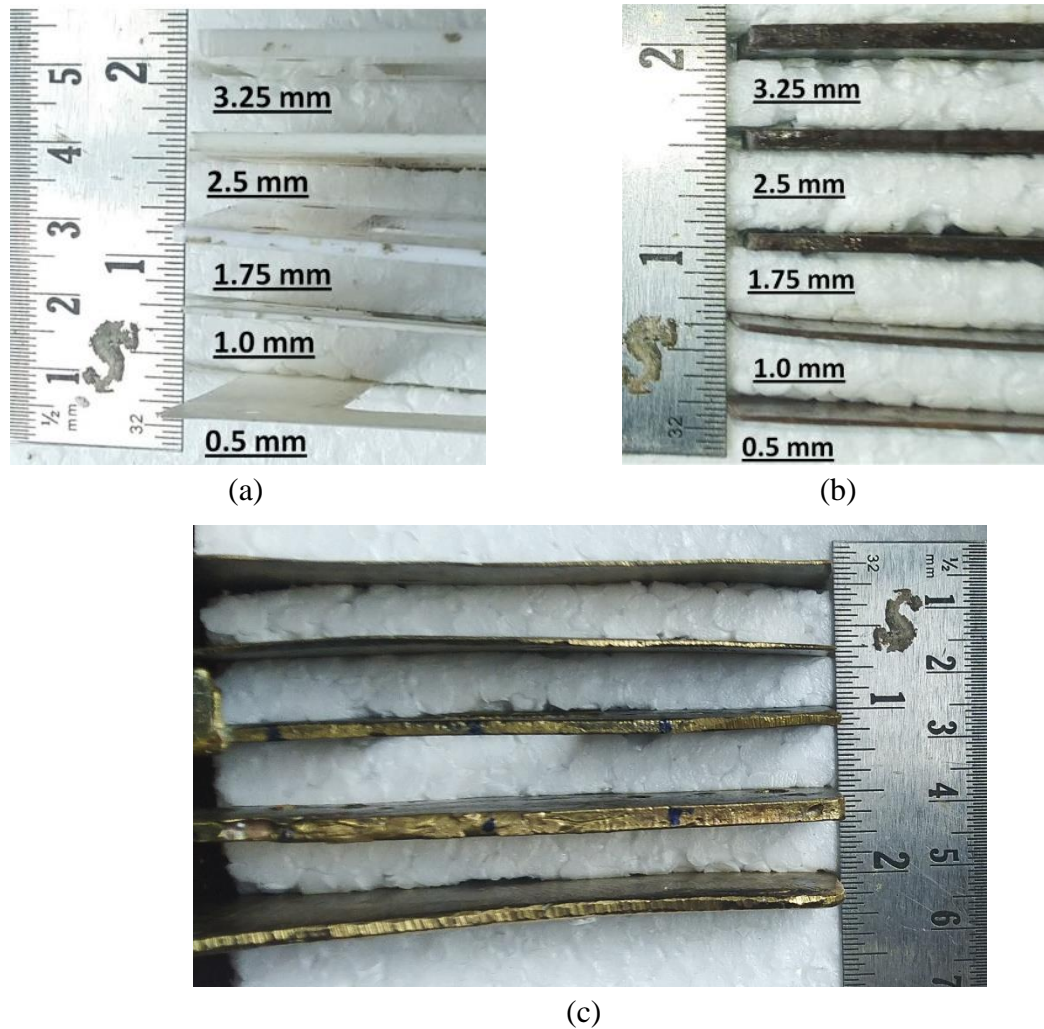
Casting procedure of the sheets: (a) side view of all dies, (b) side view of all wax sheets, (c) side view of the metal sheet.
